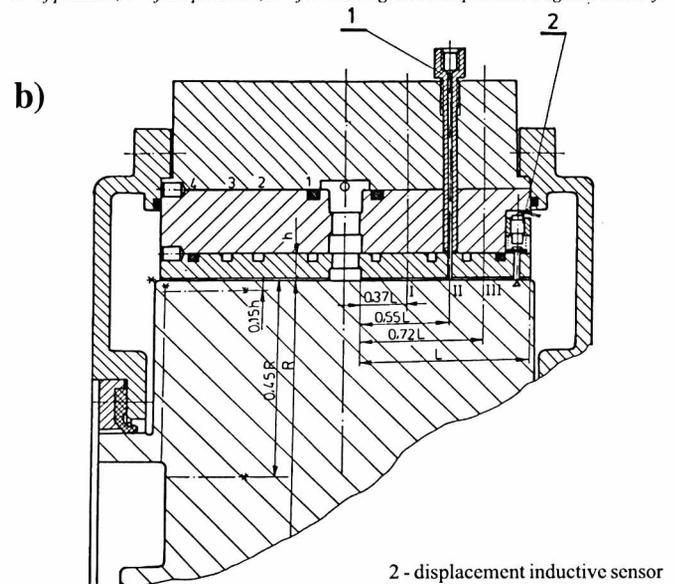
Axial cross-section through the investigated seal with the sleeve b
